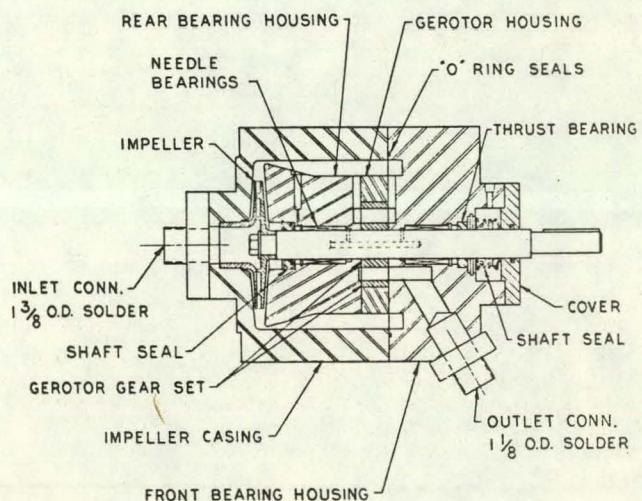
Cross Section of Prototype Boiler Feed Pump.
